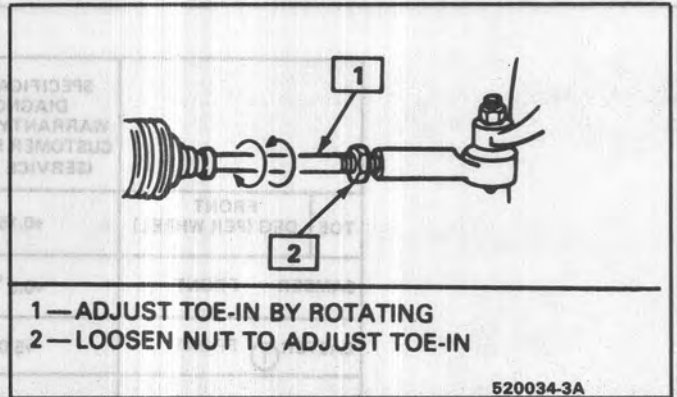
Adjusting Toe-In (Front and Rear) Typical
